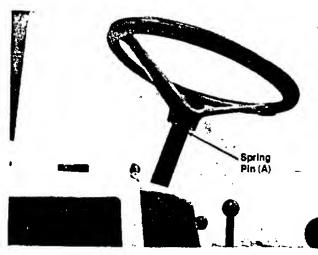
STEERING WHEEL ASSEMBLY SEAT
